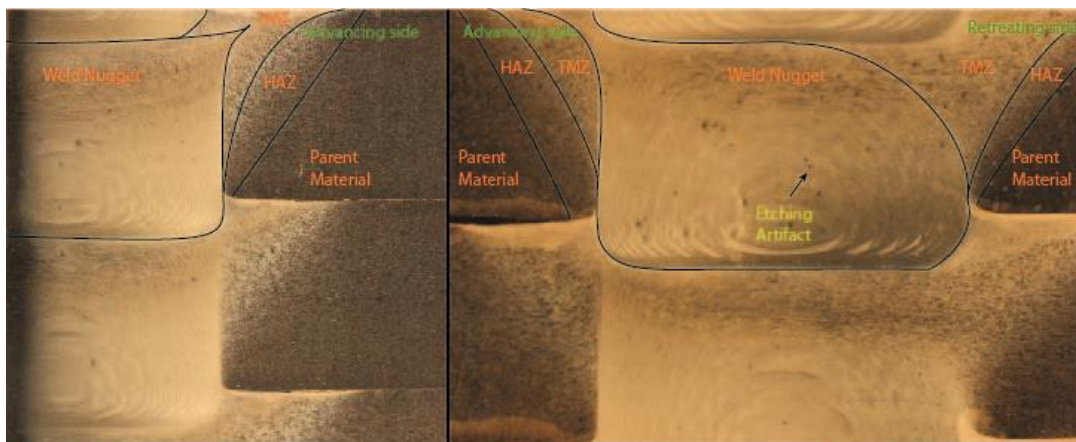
The representative images taken of the eight weld of both the start and end polished sample of as welded 2219-T87
